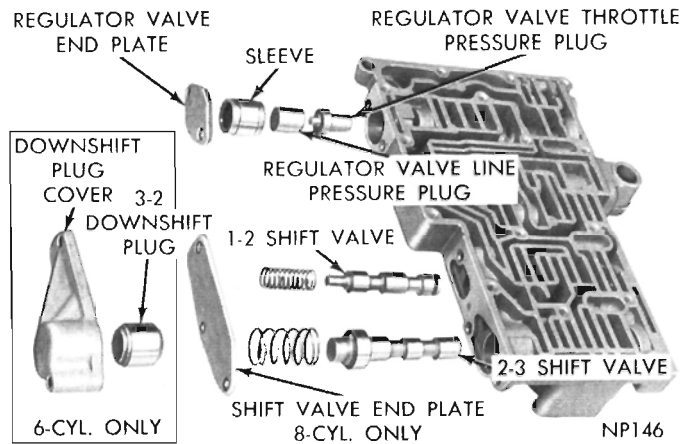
Valve Body—Shift Valve Side—Disassembled
